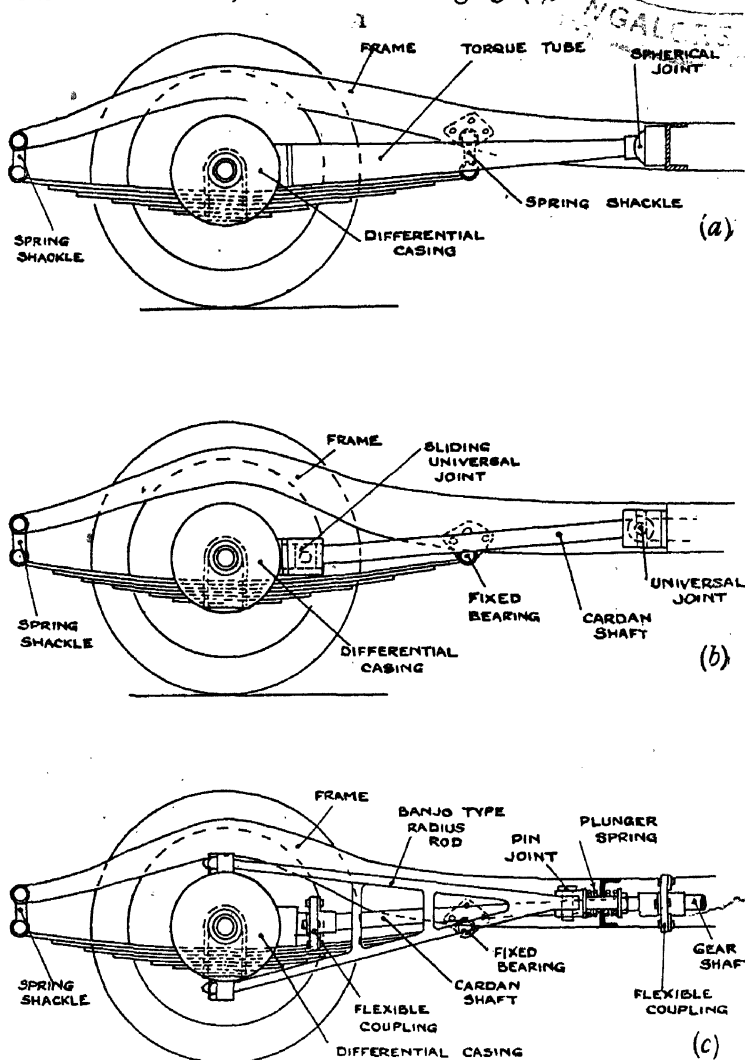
Alternative Forms of Final Drives, and Suspensions.
